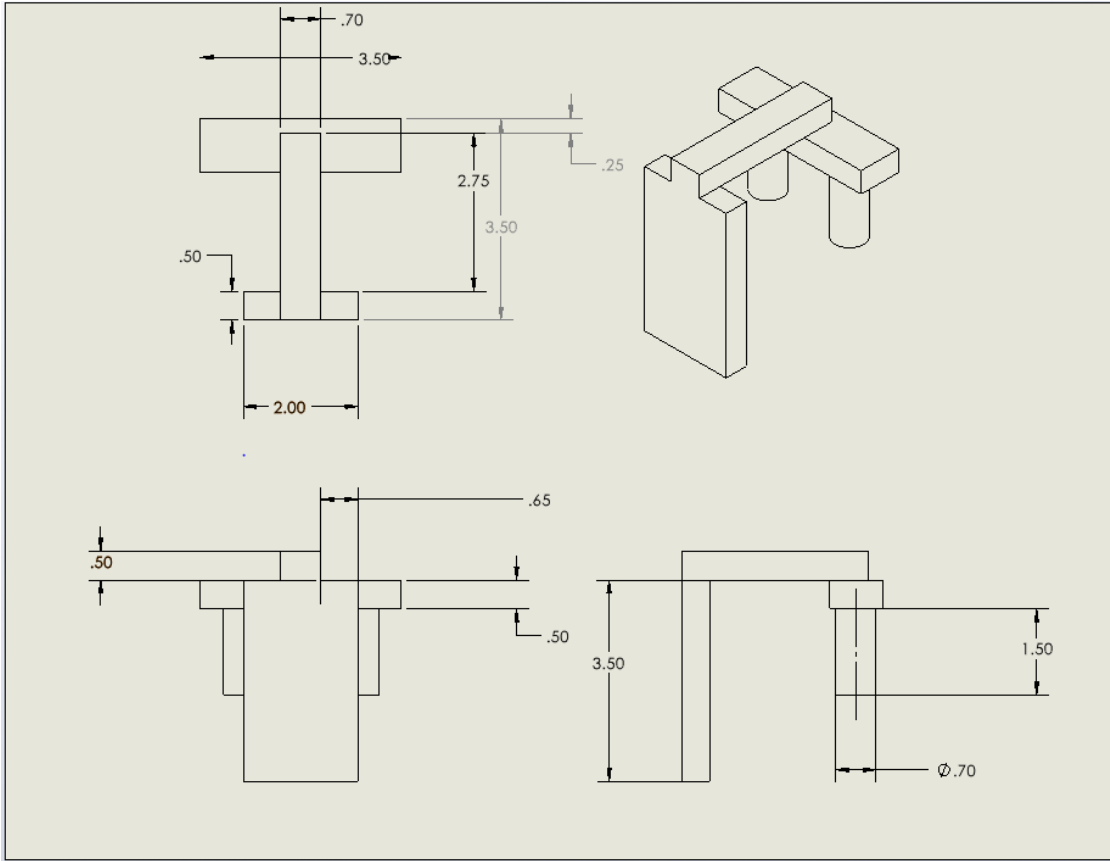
Dimensioned Drawing of the Main Section of the Nozzle Holder
